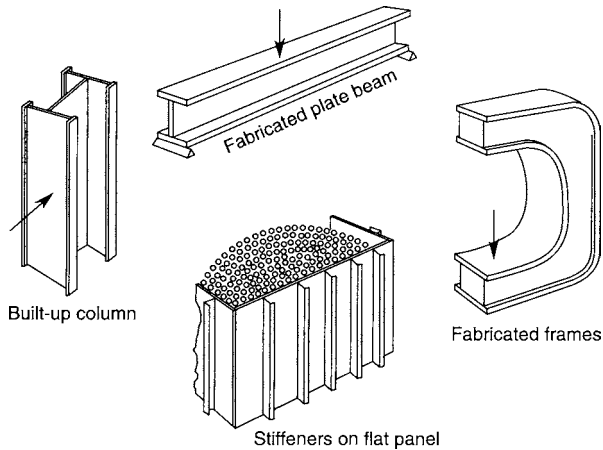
Examples of welds stressed in horizontal shear.
